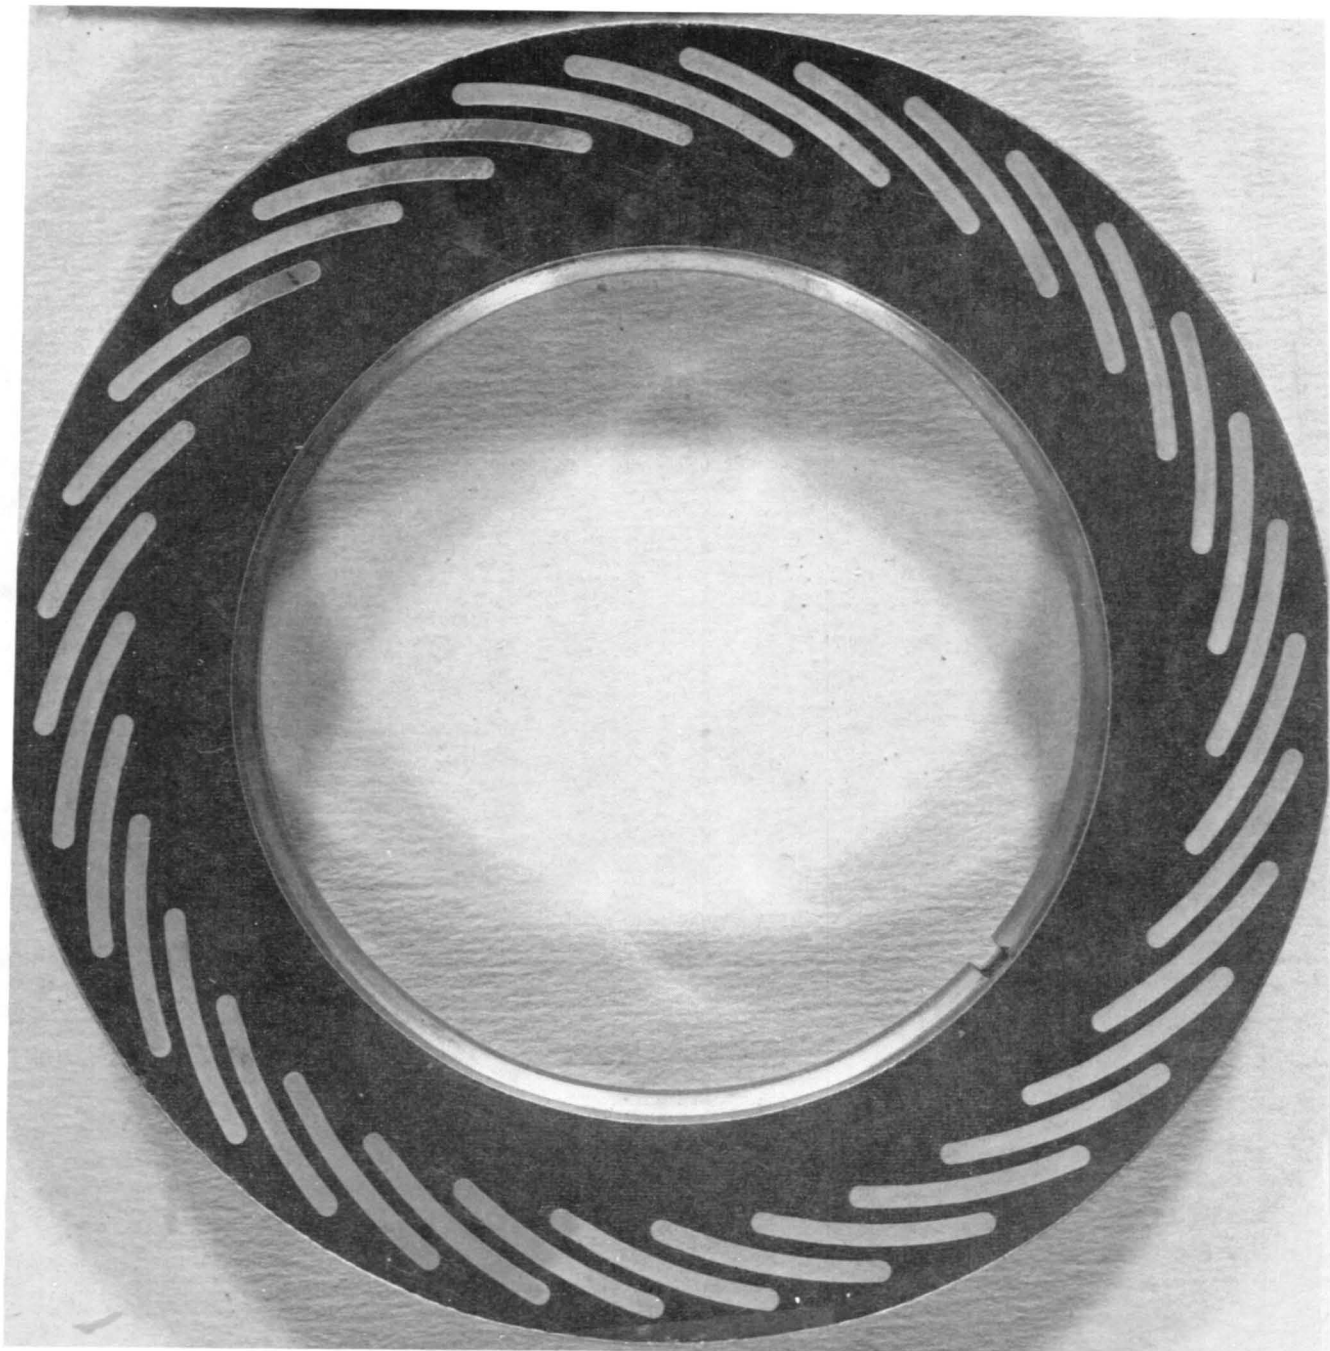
Phase V Pressure Balanced Spiral Groove Mating Ring
